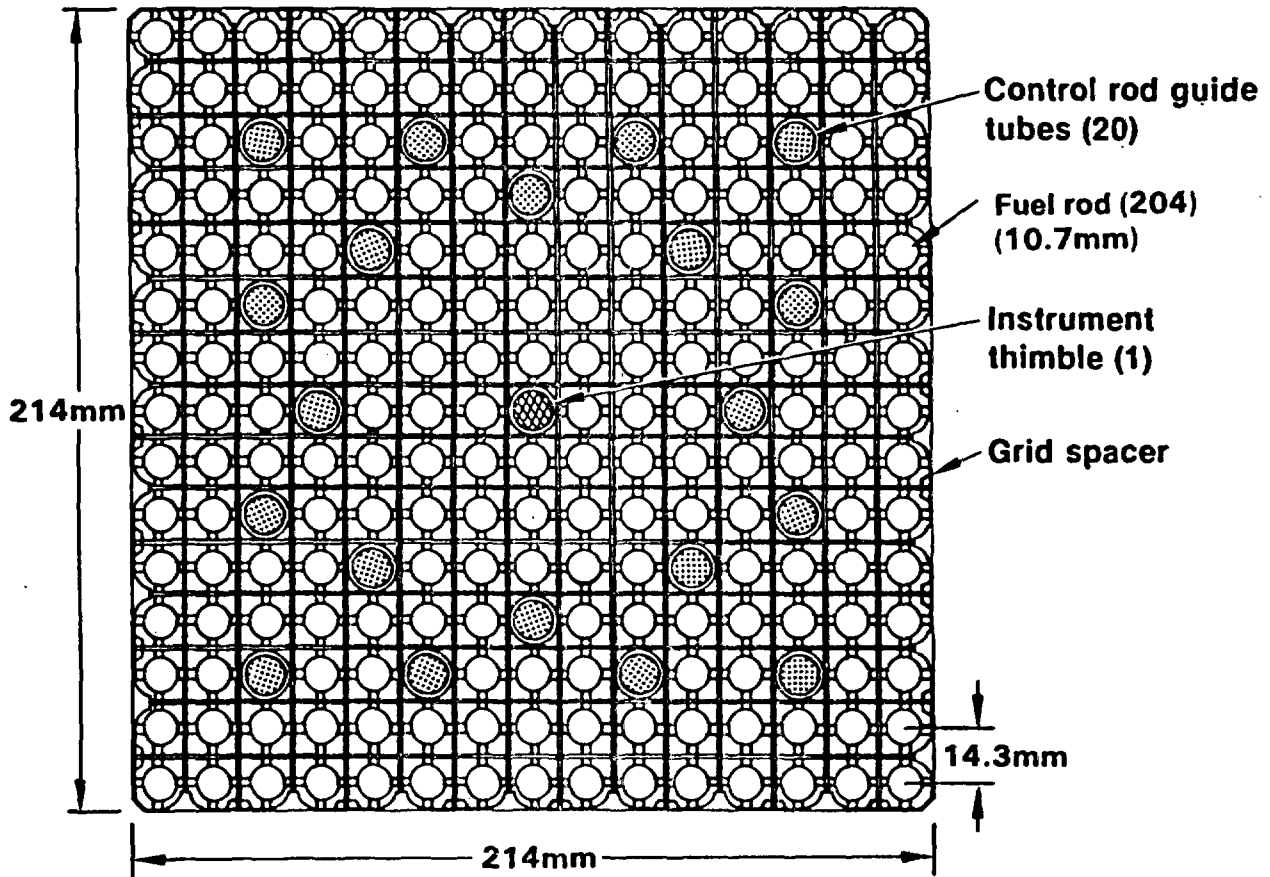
Surry 15x15 PWR Spent Fuel Assembly Cross Section
